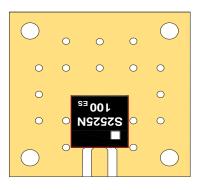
Applying the Solder Paste to the 7 Points on the PCB Surface
